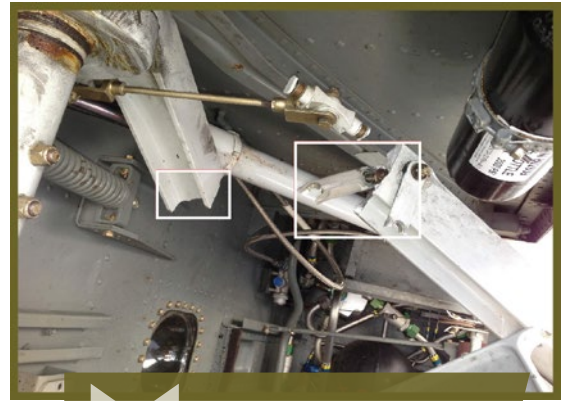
Left-hand drag strut failure at the down-latch lever mounting point
